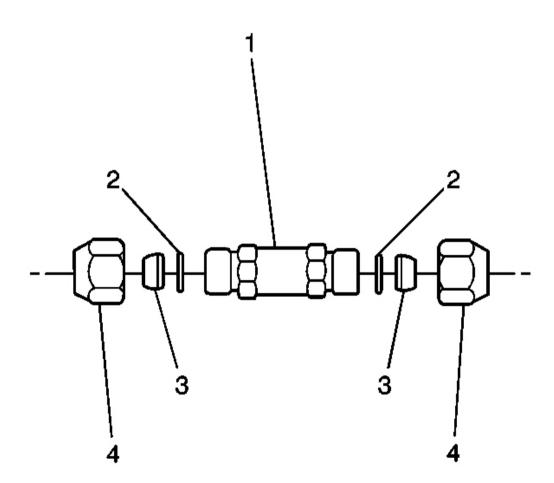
A/C Refrigerant Filter Components Courtesy of GENERAL MOTORS CORP.
